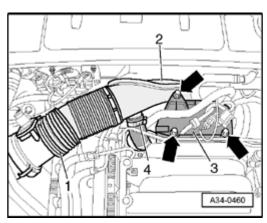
Identifying Holding Plate, Intake Air Hose, Hose & Air Duct Courtesy of VOLKSWAGEN UNITED STATES, INC.
